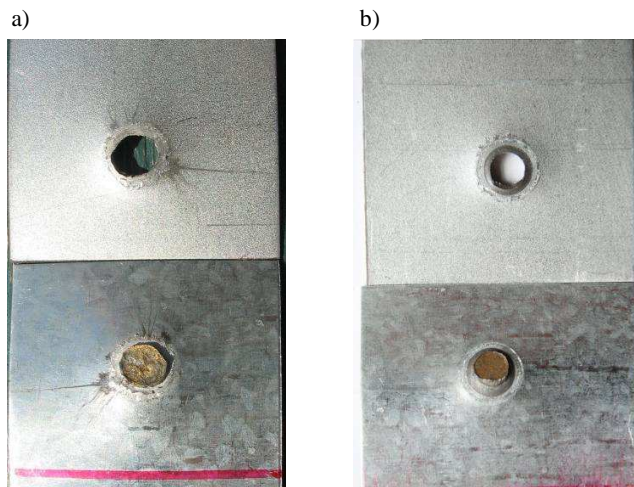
Welded samples after tensile test: a) standard RSW, b) DeltaSpot RSW
